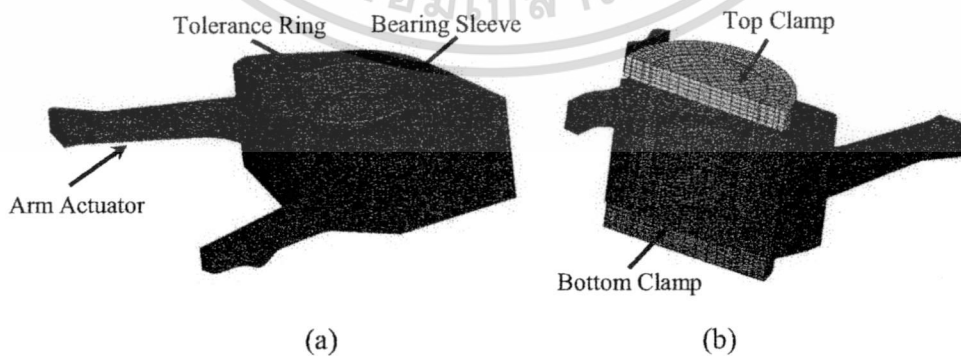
(a) Three-dimensional (3D) model and (b) Cross-sectional view of the finite element (FE) model used for the tolerance ring assembly process
